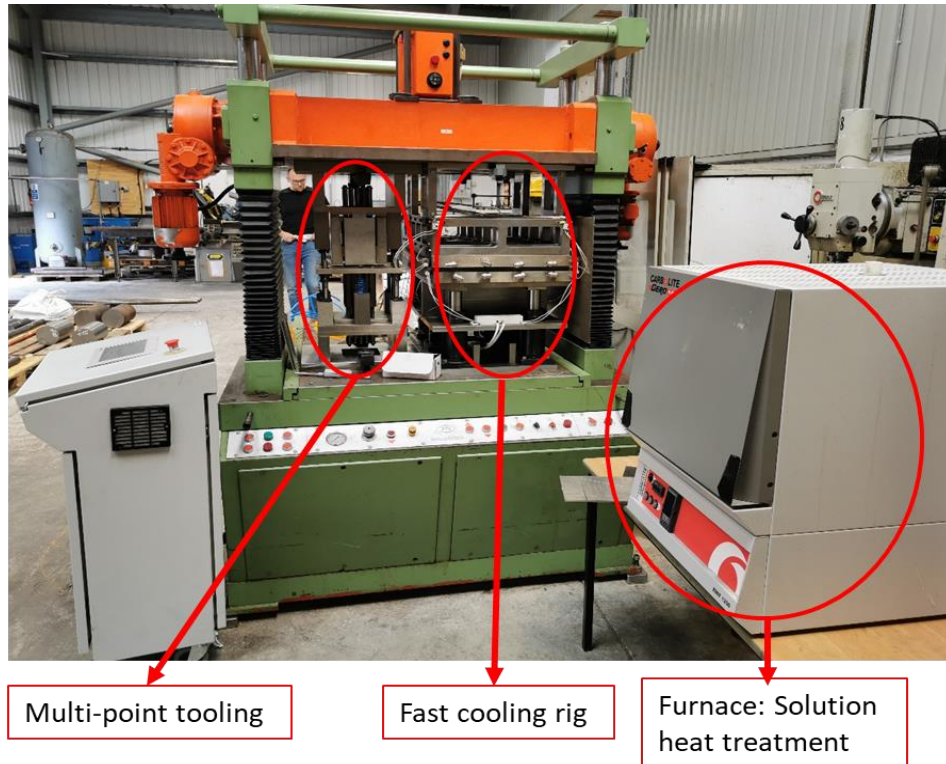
Multi-point hot forming with fast cooling system developed by the University of Strathclyde
